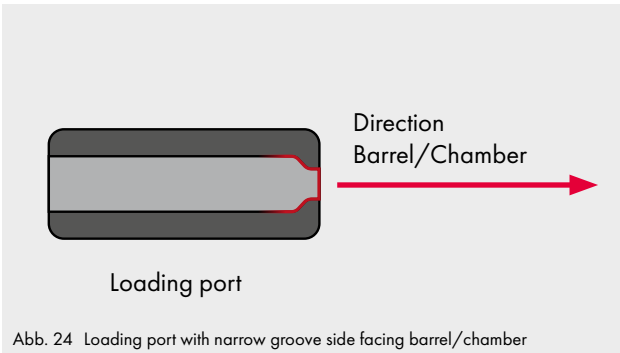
Loading port with narrow groove side facing barrel/chamber
